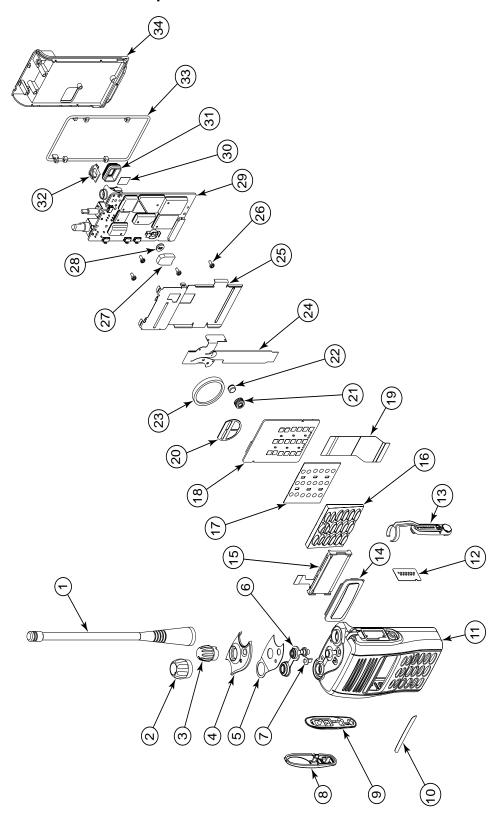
EX600 / EX600•XLS Radio Exploded View
